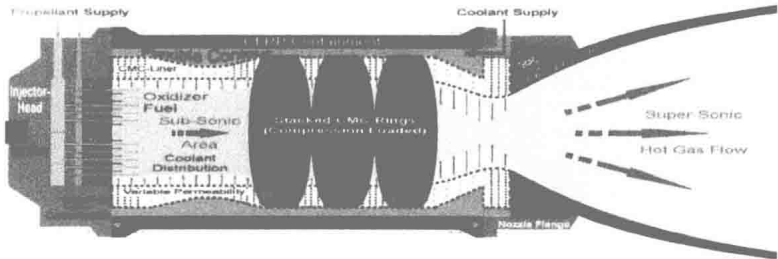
Design principle of DLRs composite thrust chamber assembly²⁶.
